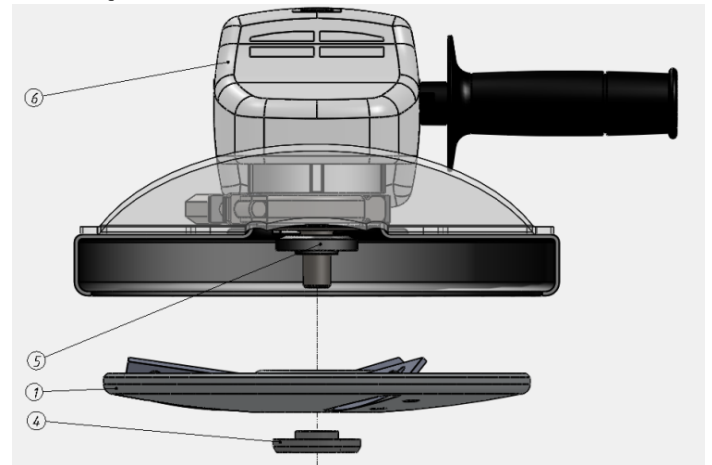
Mounting scheme of log peeler tool D220 SPH / PLR to the 9'' (230 mm) angle grinder
